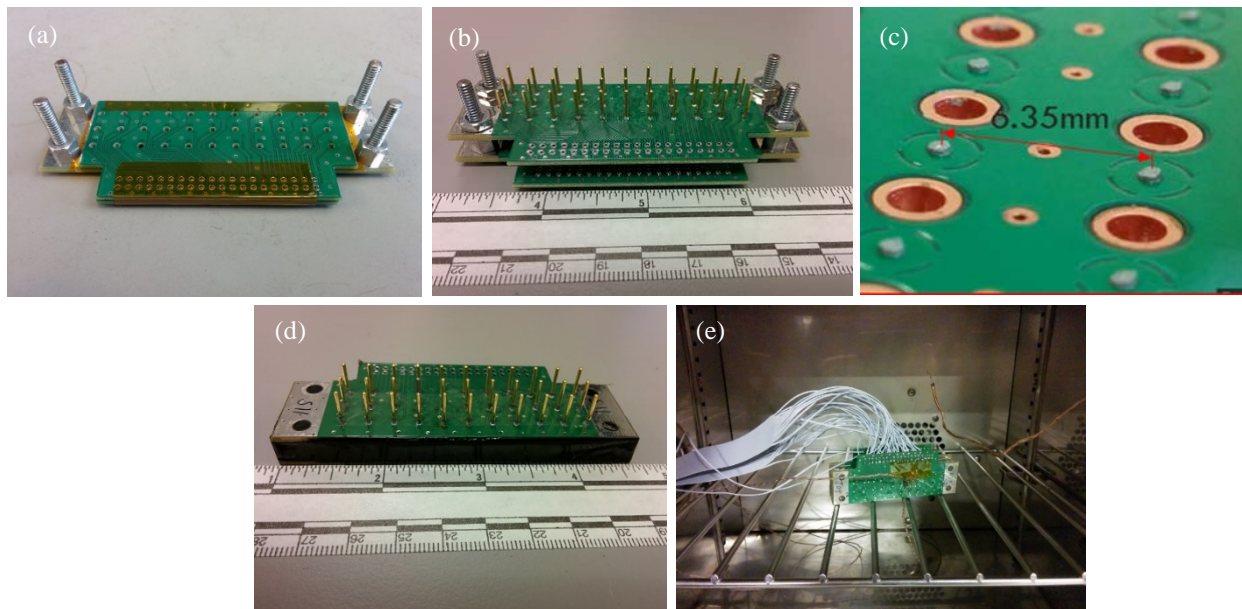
Specimen assembly steps: (a) alignment of locking plate (b) through-hole soldering (c) stencil surface mount solder (d) potted specimen with 6mm standoff height (e) wire connections.
